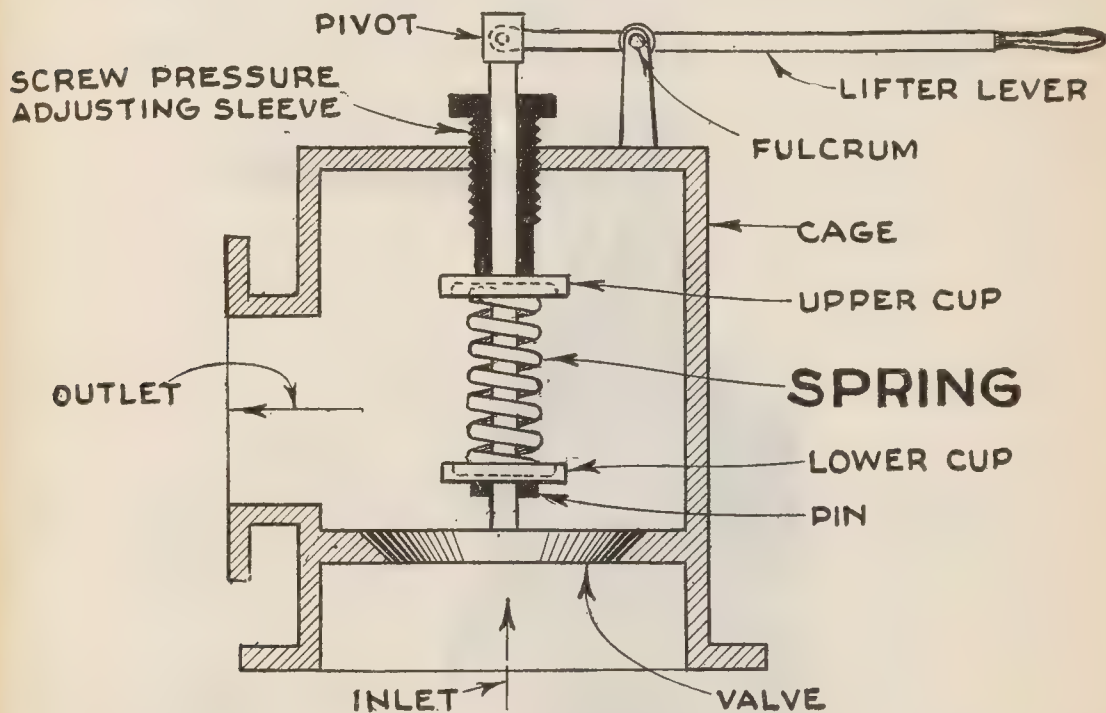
,245.—Elementary spring safety valve showing essential parts with exception of the "popping" attachment provided on the "pop" type of spring valve.
